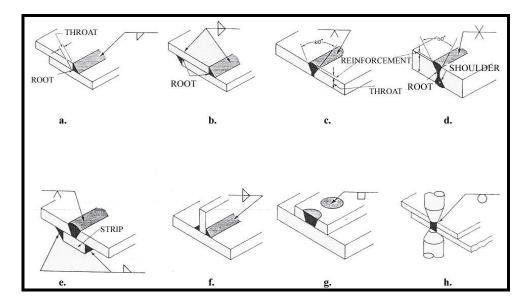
Types of welded joints: a) and b) Lap weld; c) and d) Groove weld; e) Single vee groove; f) Double fillet tee joint; g) Plug or rivet weld; h) Spot weld (Ellison, 1987:211).
